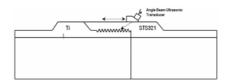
Schematic of pulse-echo technique applied to the testing of thread part.
